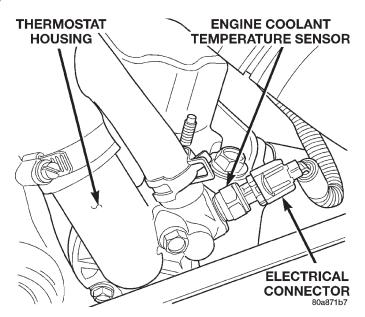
Engine Coolant Temperature Sensor—4.0L Engine
